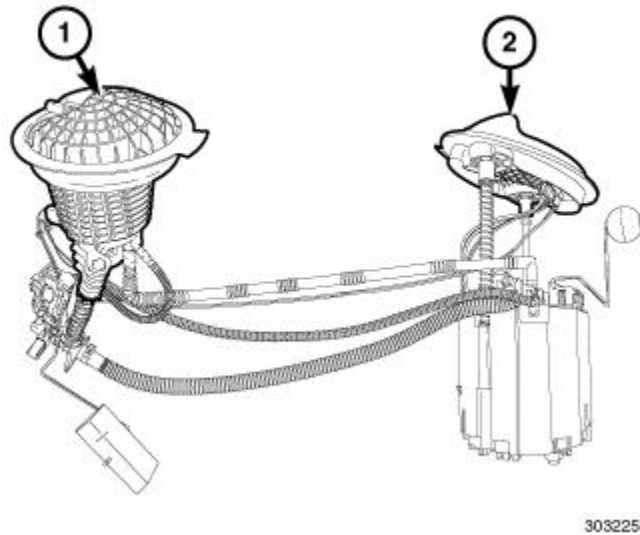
Main Fuel Pump Module & Auxiliary Fuel Pump Module
